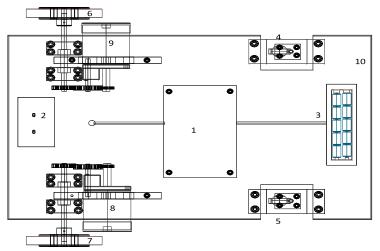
Schematic View of the Robot The complete design of the robot (top view): 1: Circuit box, 2: Sensor circuit, 3: Battery box, 4: Back free wheel 1, 5: Back free wheel 2, 6: Front power wheel 1, 7: Front power wheel 2 8: Stepper Motor 1, 9: Stepper Motor 2 and 10: Base
